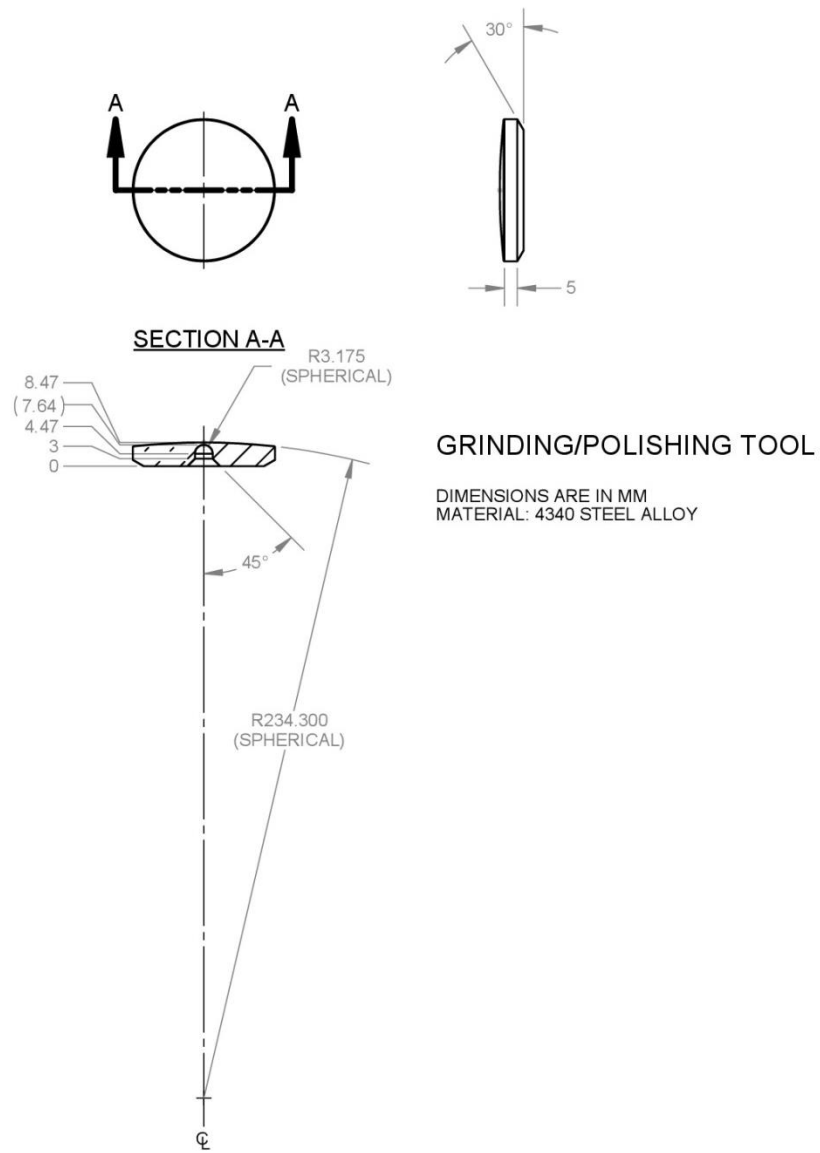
Mechanical drawing of the tools for making Sample 5 and Sample 6.
